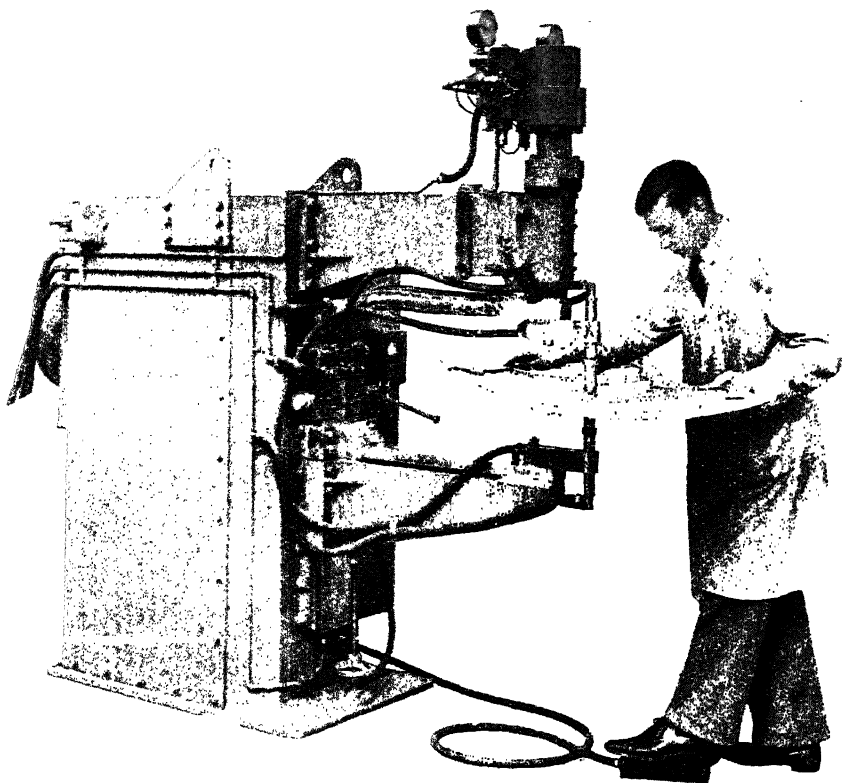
SCIAXY AIR-OPERATED SPOT-WELDING MACHINE BEING USED FOR WELDING STIFFENERS TO A PANEL
